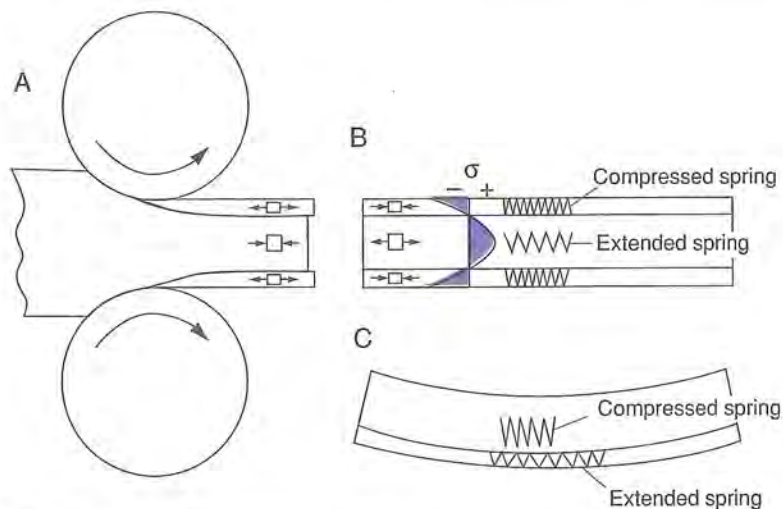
Development of residual compressive stresses in the surface of a lightly cold-rolled metal plate. If a thin layer is removed by machining, the plate will bow as shown.
